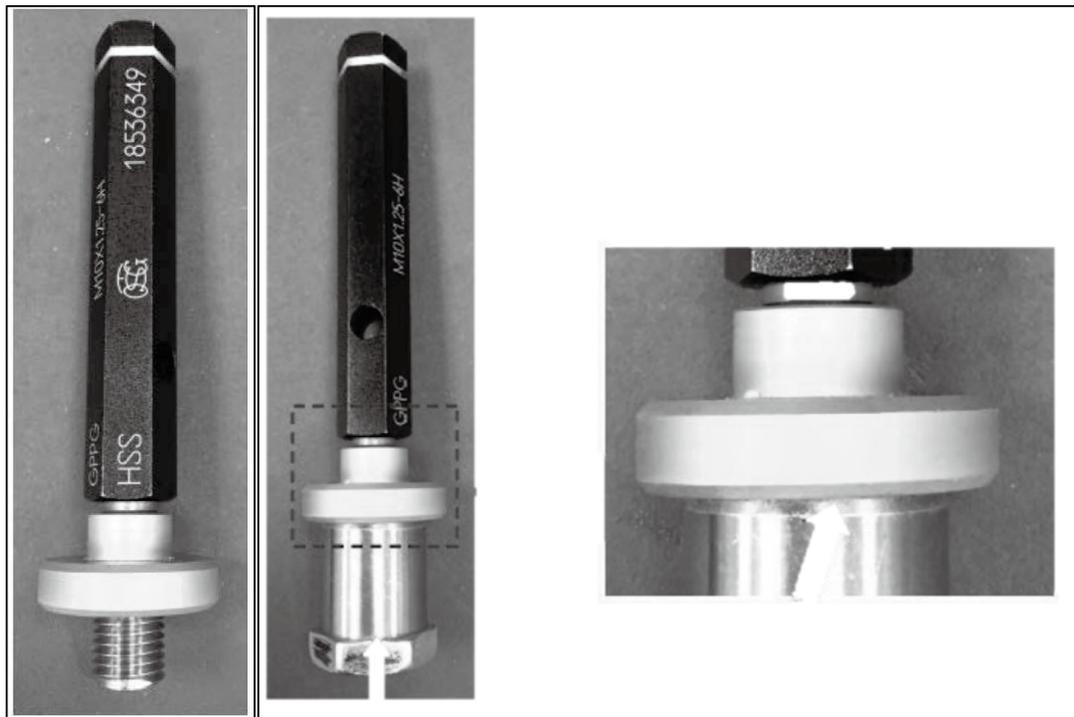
Thread plug gauge with a flange for internal screw nut inspection.
